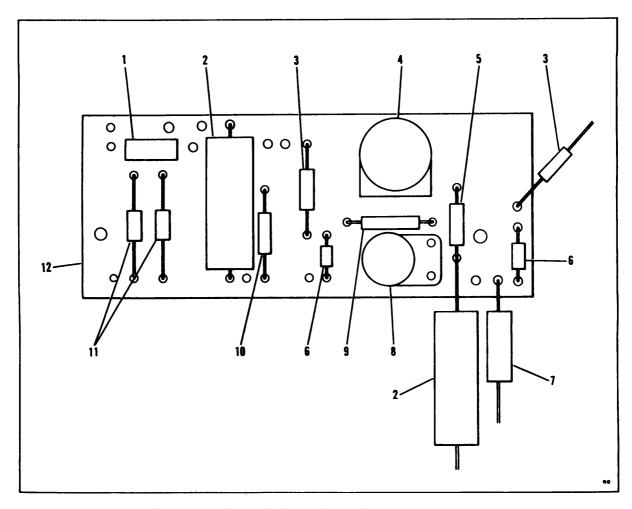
Printed Circuit Beard Assembly, Part No. 400D-75F
